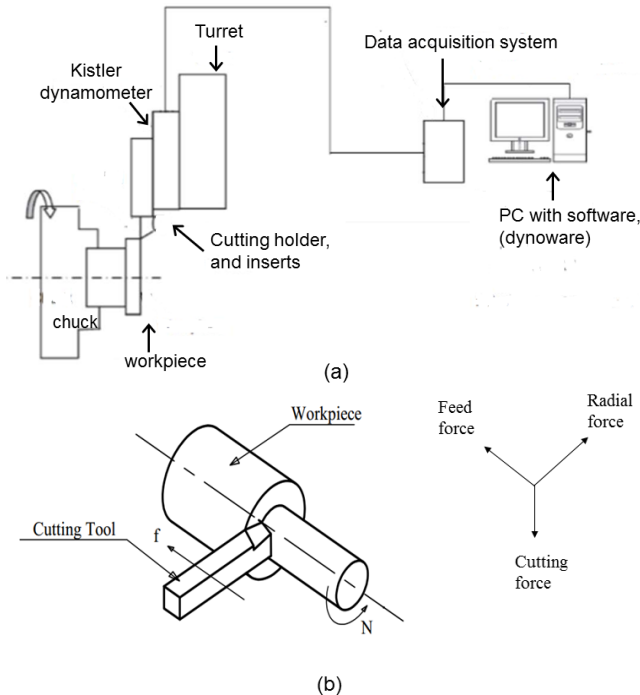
Schematic diagrams of (a) experimental setup, and (b) tool-workpiece interaction and machining force directions
